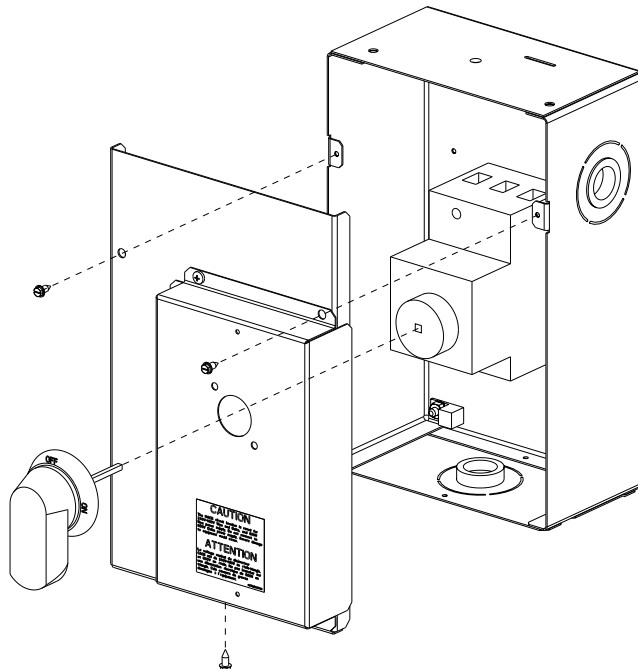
Handle and Shaft Assembly for HACR CONVENIENCE OUTLETS
